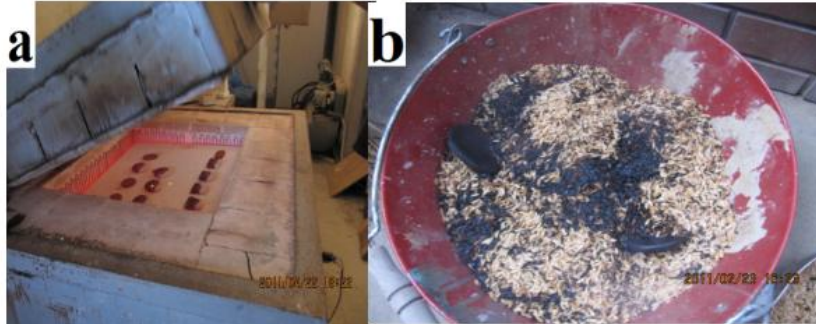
Firing the test pieces; (a) An electric kiln and the test pieces; (b) Test piece was dipped in husk.
